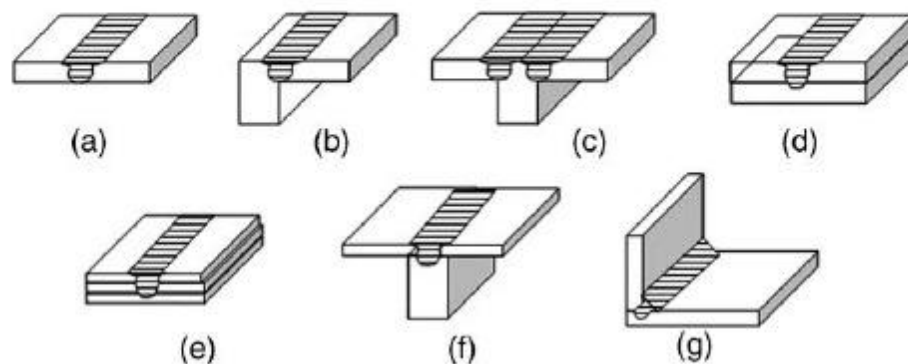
, A Variety of FSW Joint Configurations. (a) Butt Weld, (b) Corner Weld, (c) Double T-Joint, (d) Lap Weld, (e) Multiple Plate Lap Weld, (f) T-Joint, (g) Fillet Weld (Mishra et al., 2005)
